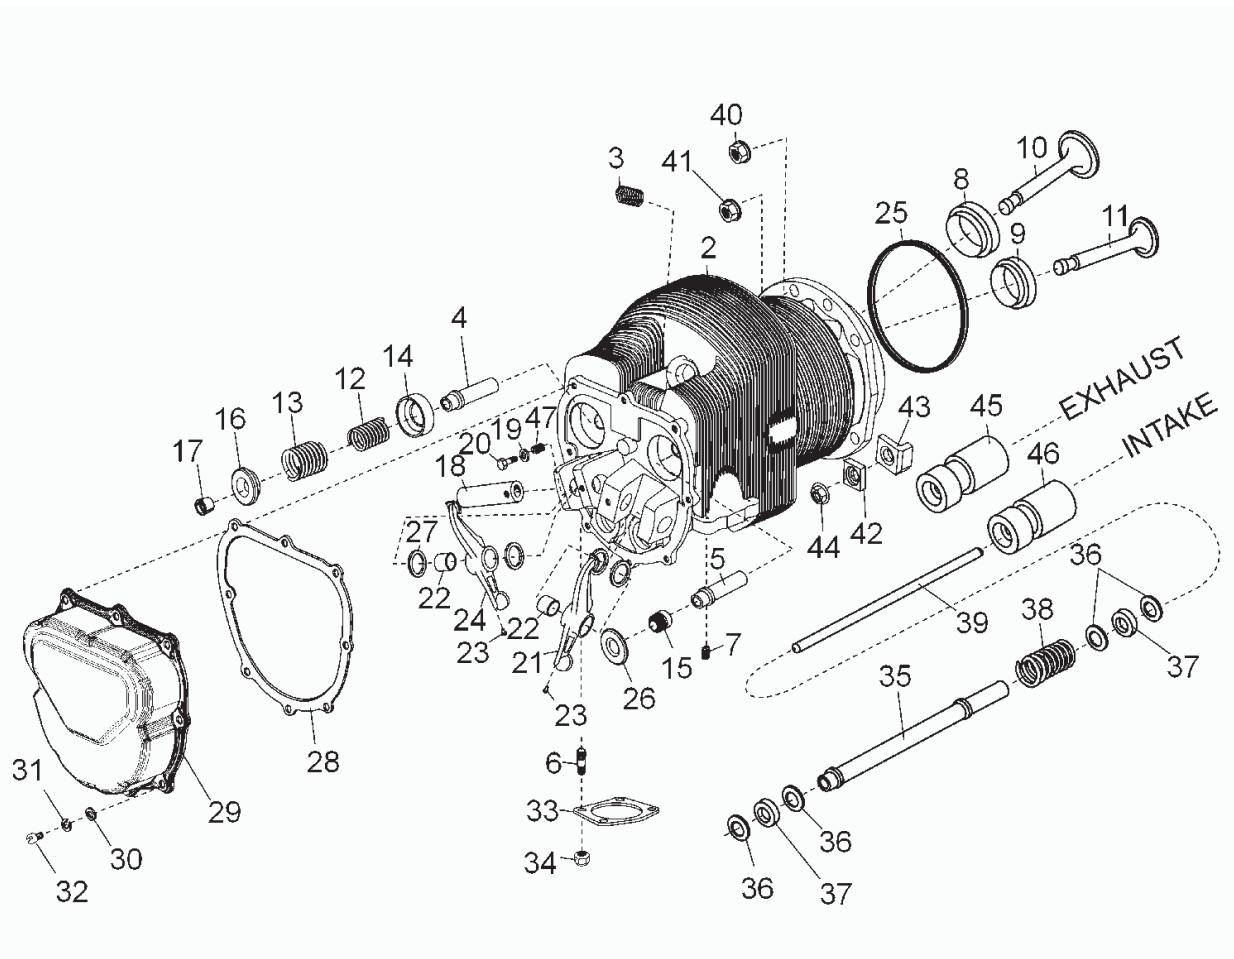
Updraft Cylinder Assembly A B C
